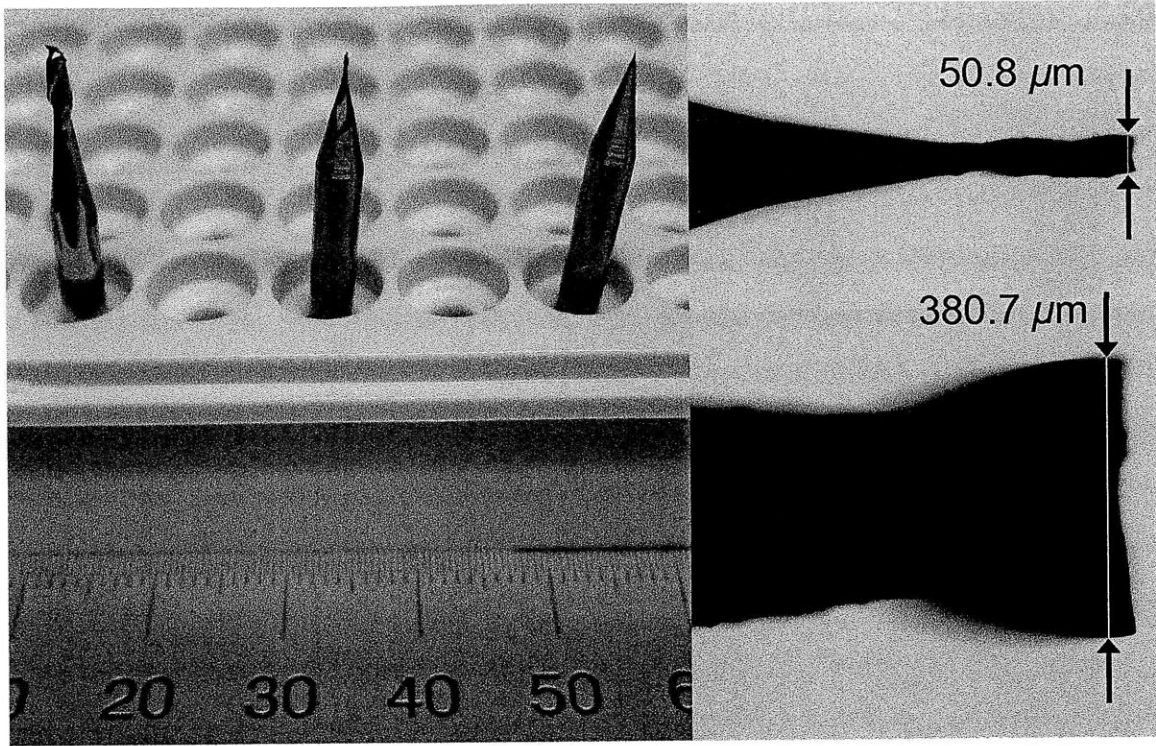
Photograph and micrographs of standard length, two flute micro endmills used for device fabrication
